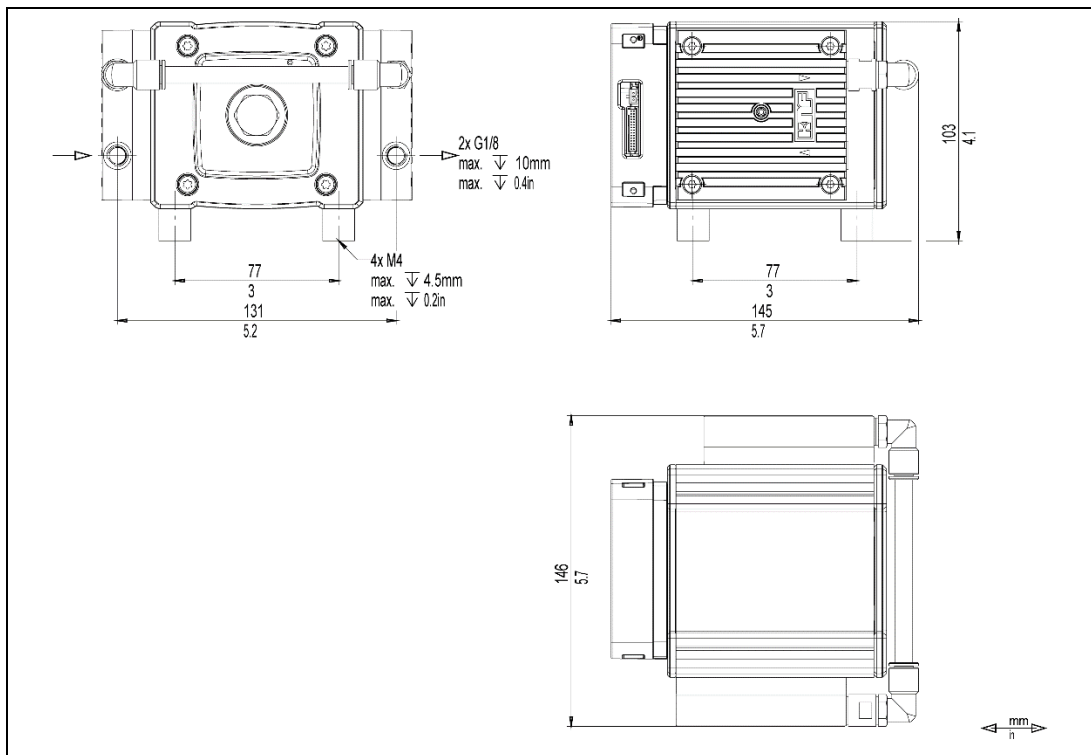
Mounting dimensions of pump type MGP75-22K_V-XB
